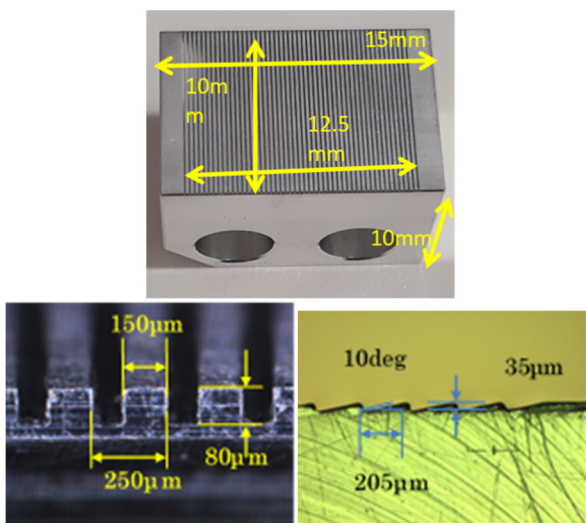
Manufactured grating. below figure shows a magnified view of the grating surface.
